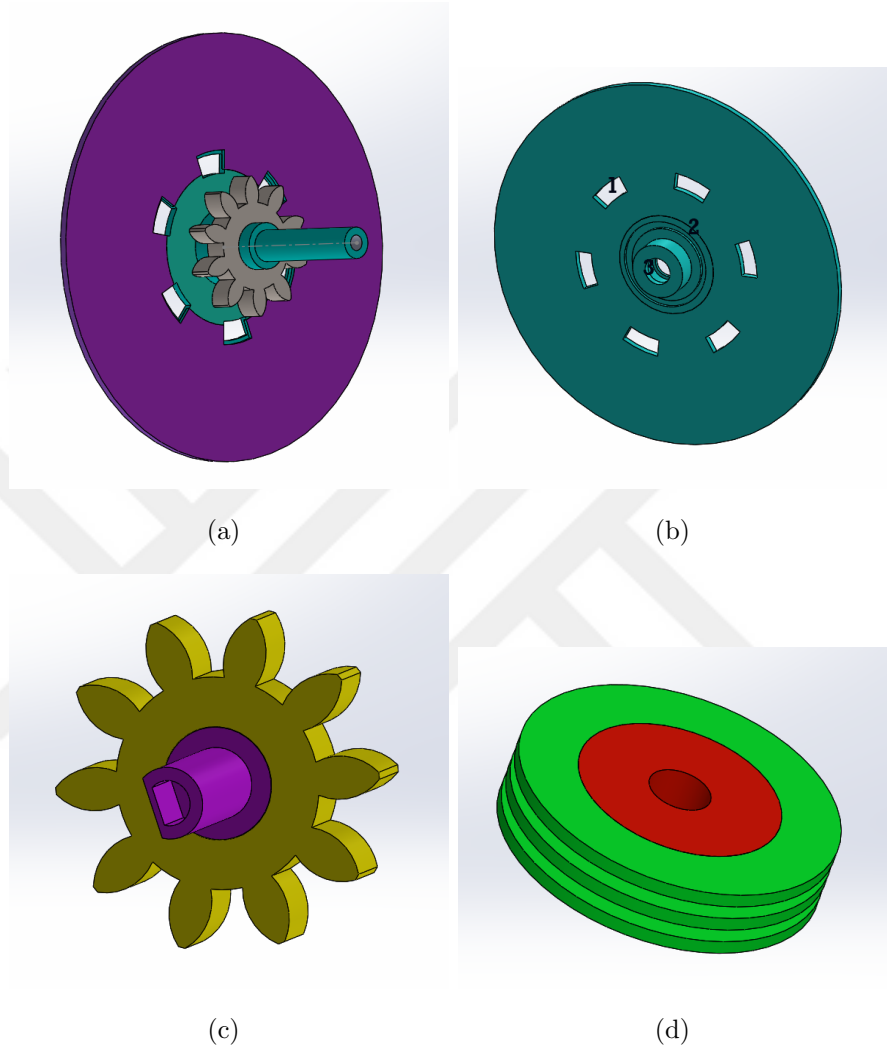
(a) Hub with gear. Purple : flexible material(TPU) and green : hard material (PLA), beige: polyamide gear (b) Lid: flexible material (TPU). 1: mortise to connect guider, 2: lid bedding, 3: bearing nest. (c) Cam Shaft of the wheel, shaft is PLA printed, gear is polyamide milled. (d) Spool connected directly to stepper motor to wrap strings, red: TPU, green: PLA
